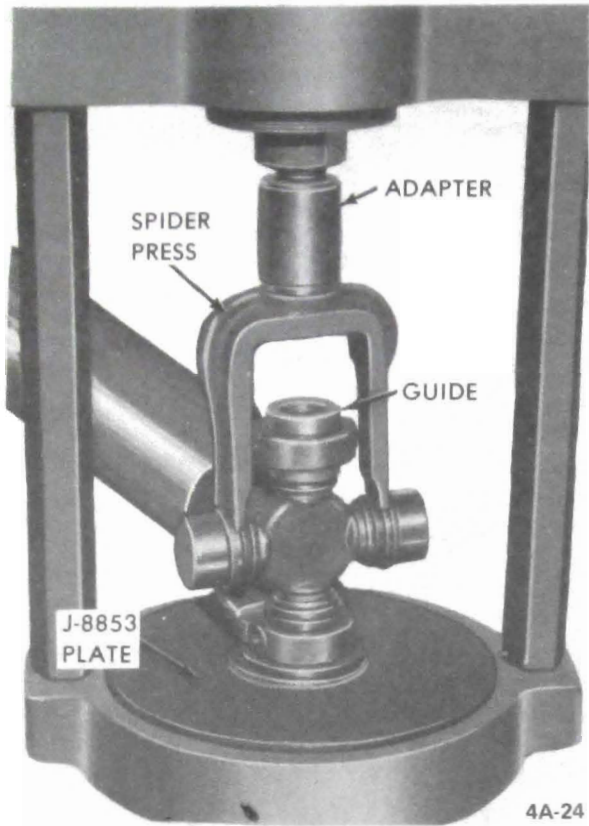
A-24 - Pressing Out U-Joint Bearing With Guide Installed
